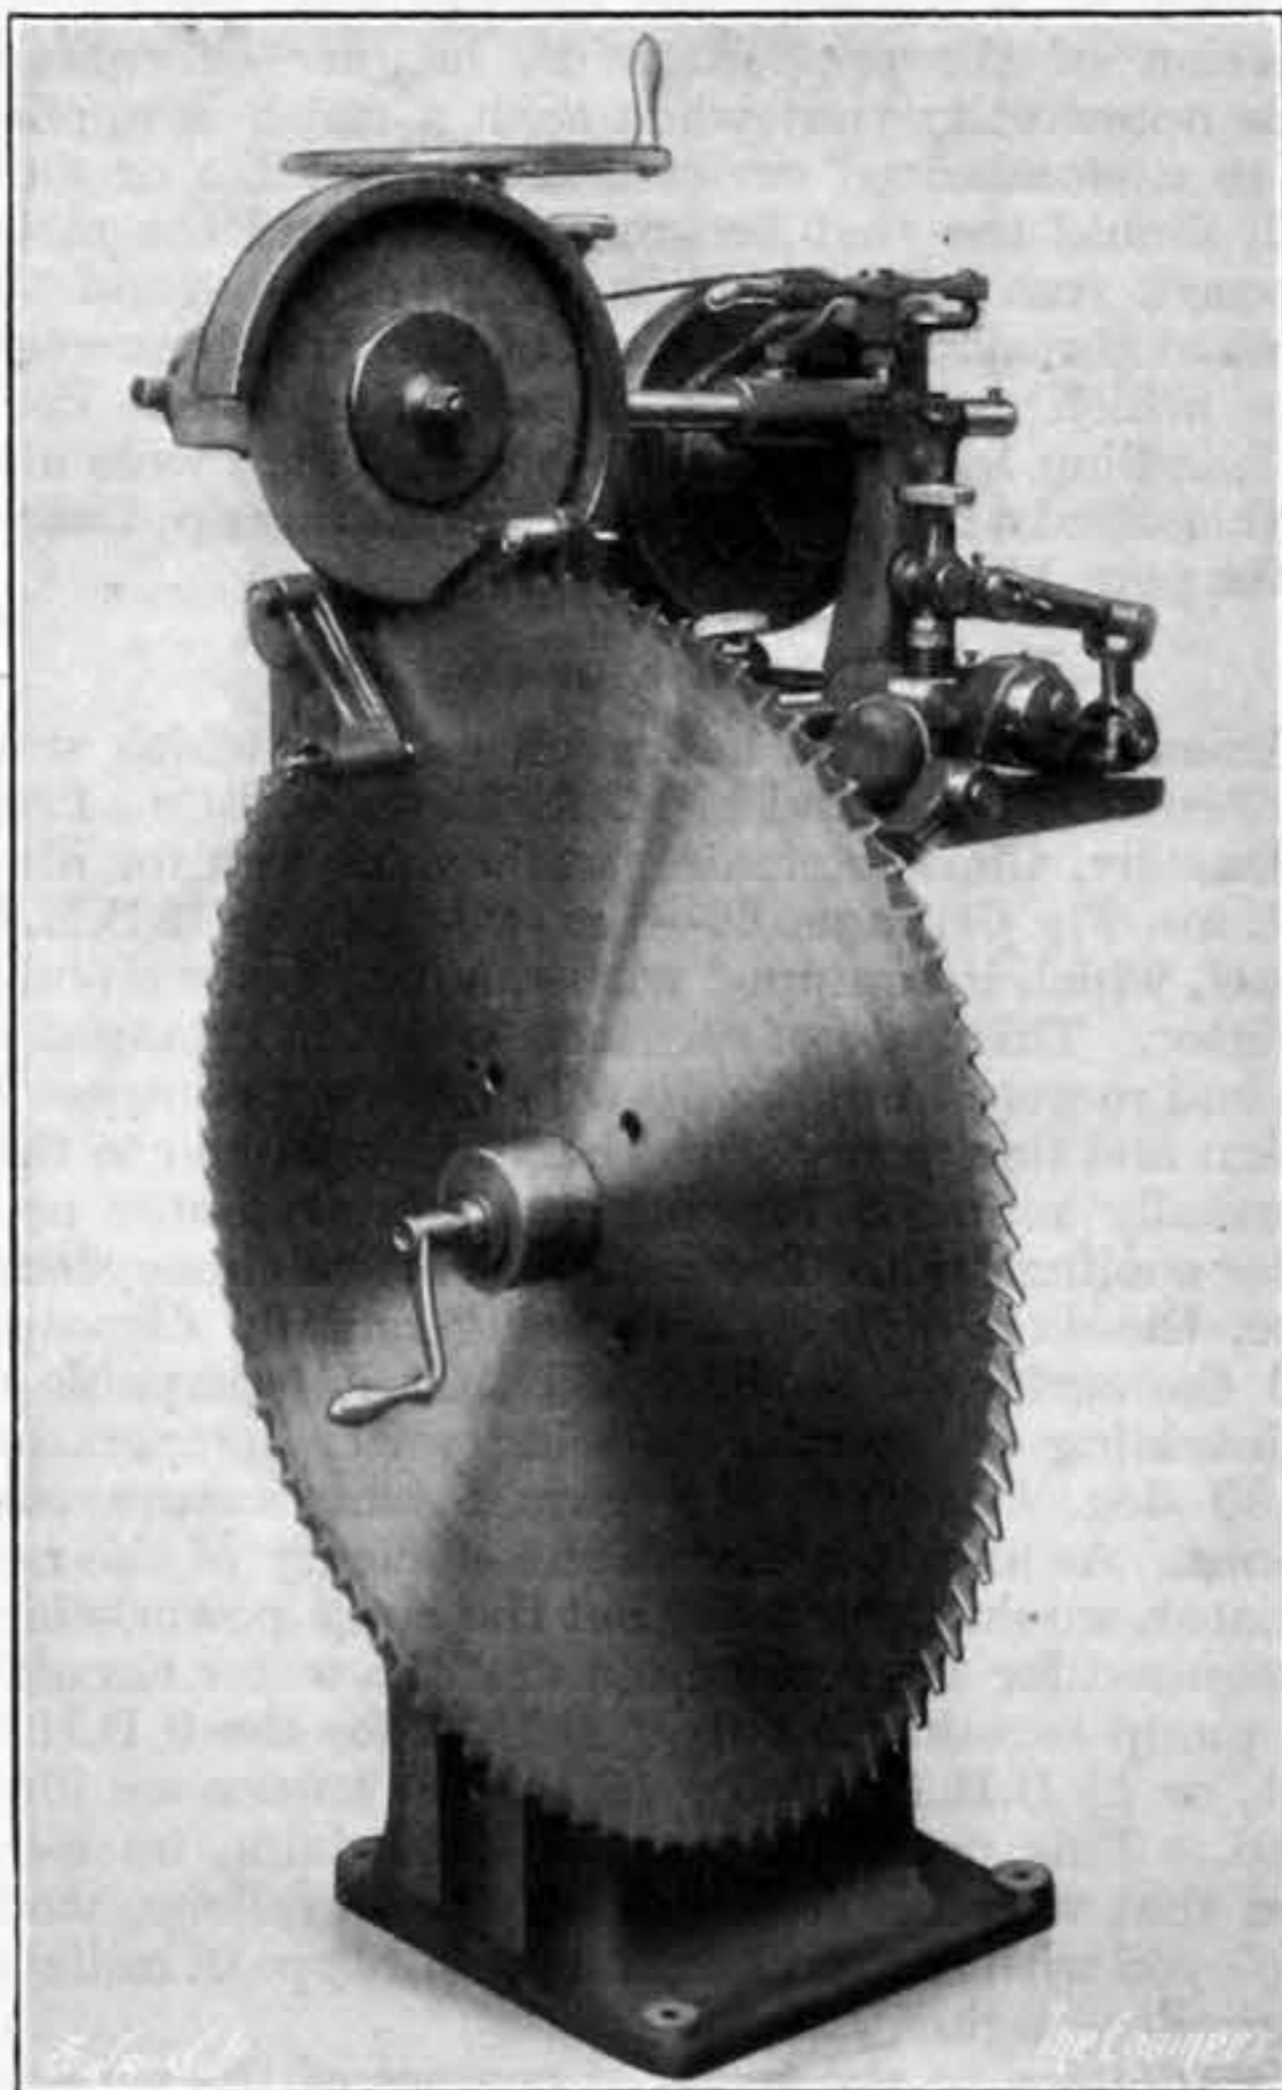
SAW-SHARPENING MACHINE—CLIFTON
